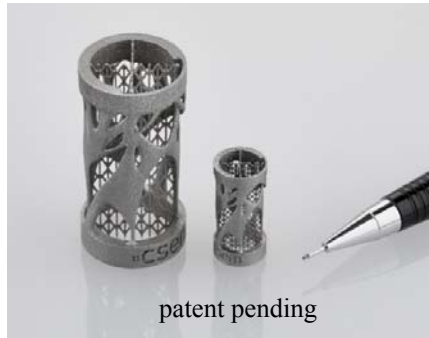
Example of minimization of the attachment points of flexure blades on the AM build plate.
